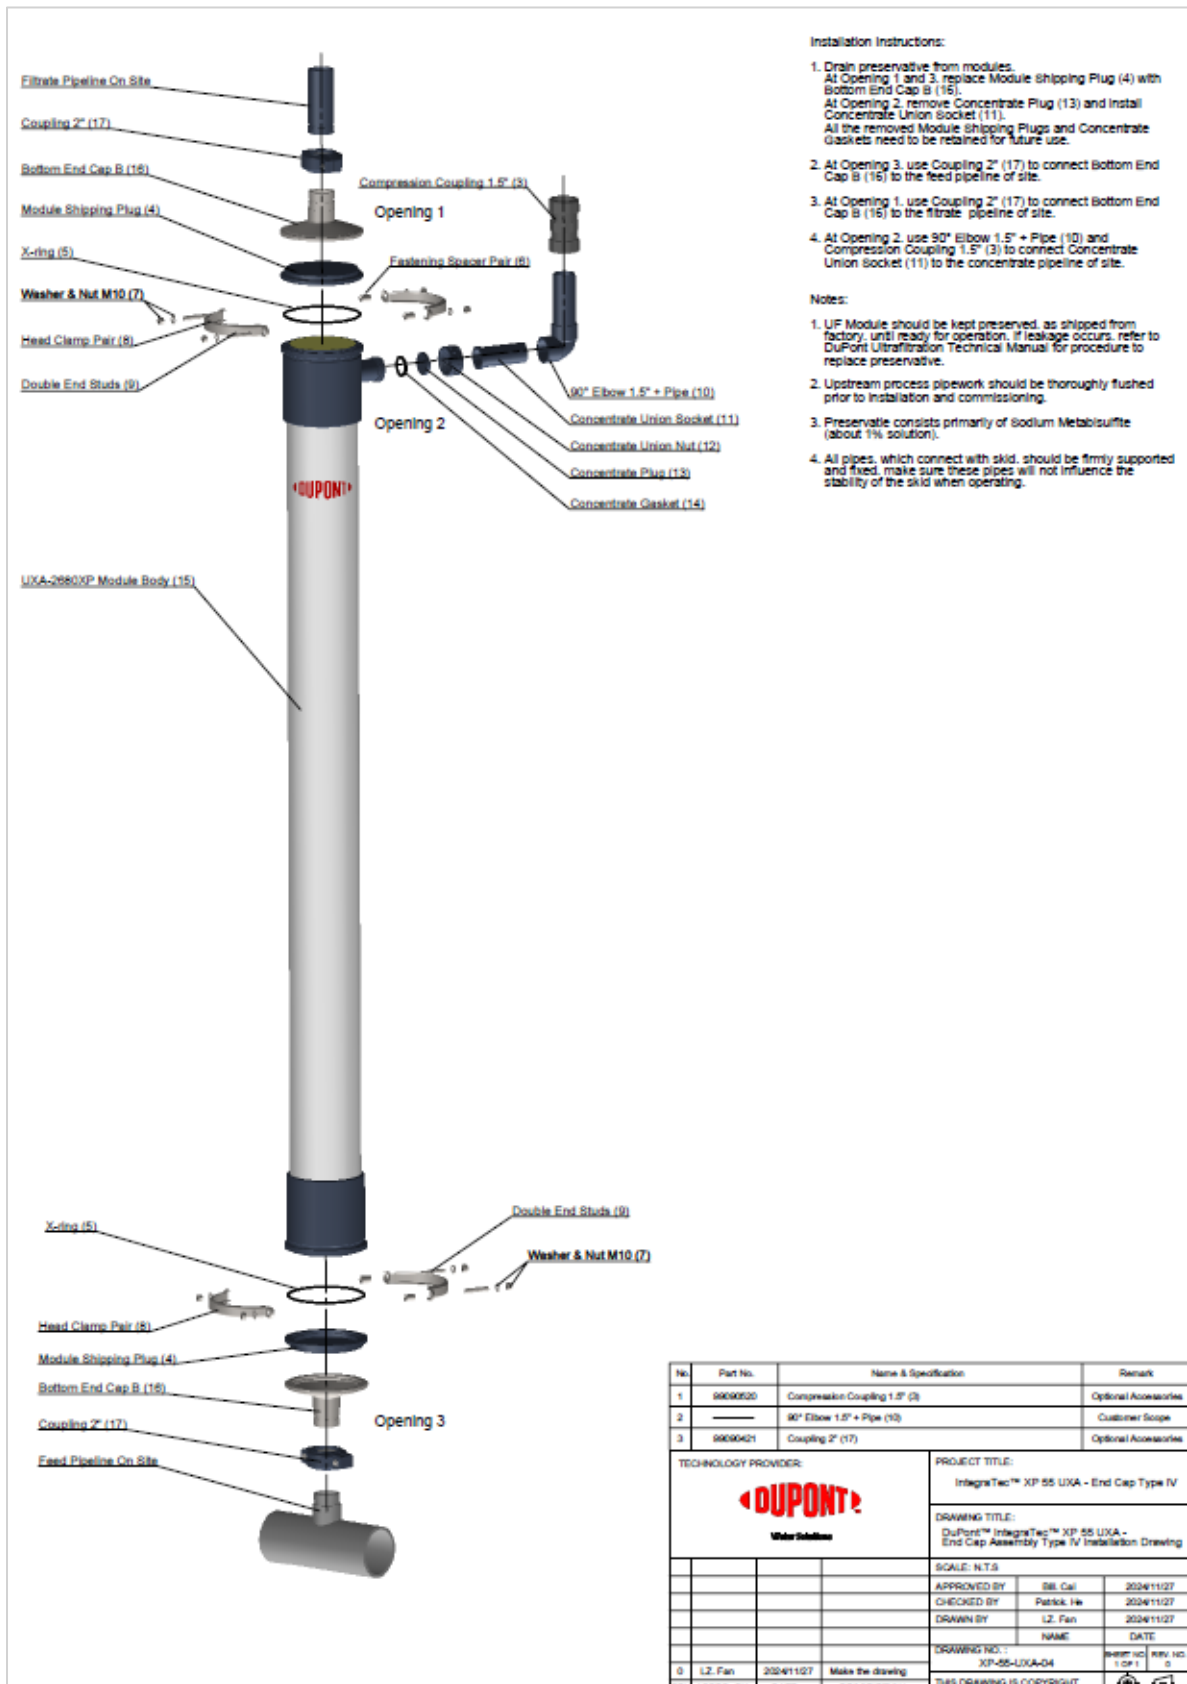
DuPont™ IntegraTec™ XP 55 UXA - End Cap Assembly Type IV Installation Drawing
